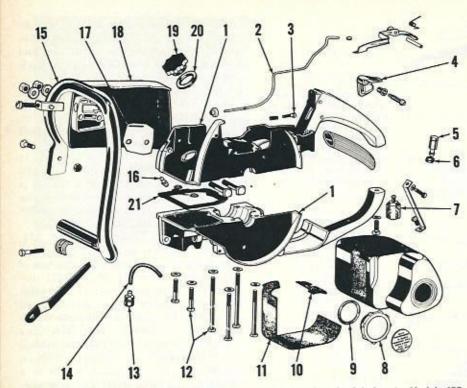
View of disassembled model 1631 crankcase, fuel tank and related parts. Models 177, 187, 340, 350, 360, 945, 1630, 1644, 1645, 1660 and 1661 are similar.
